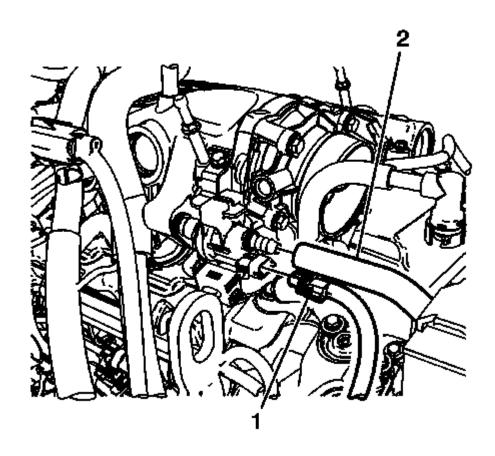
Identifying Purge Solenoid Valve Electrical Connector Courtesy of GENERAL MOTORS COMPANY
